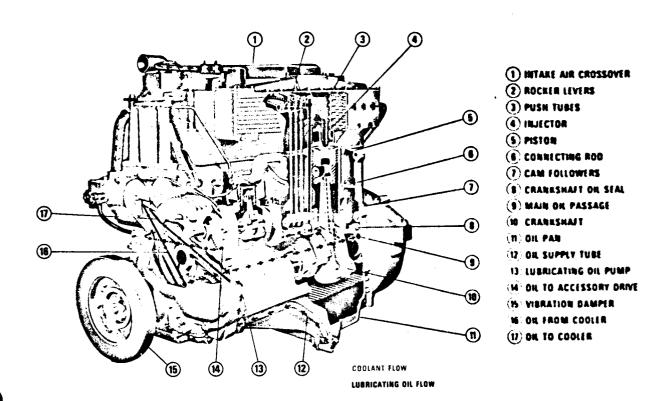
, (LWC-25). Lubricating oil and coolant flow - FFC (NTA Engine)
